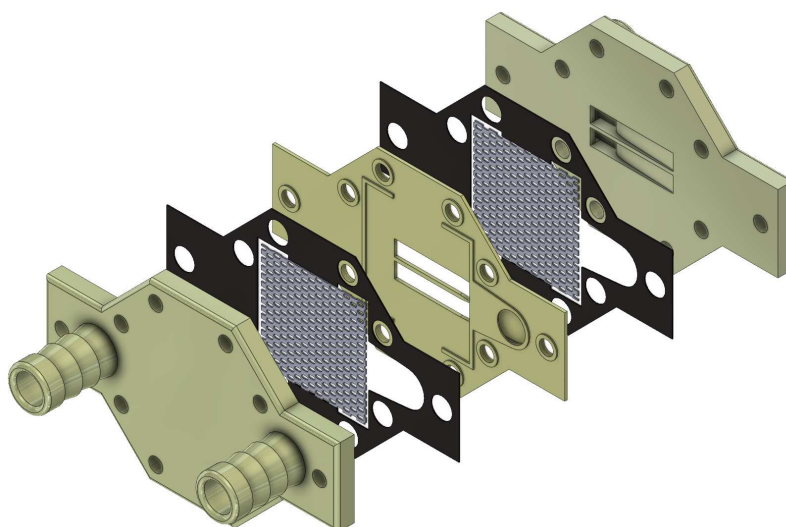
Exploded view of the electrolyzer on its side. From left to right: Product outlet (top left tube), Electrolyte inlet (bottom right tube) endplate with the variable feed channel inside at the inner side facing away from the camera; EPDM Rubber gasket (black) and nickel electrode (metallic); Feed channel plate; EPDM Rubber gasket (black) and nickel electrode (metallic); Product outlet endplate with the variable feed channel inside at the inner side facing towards from the camera
